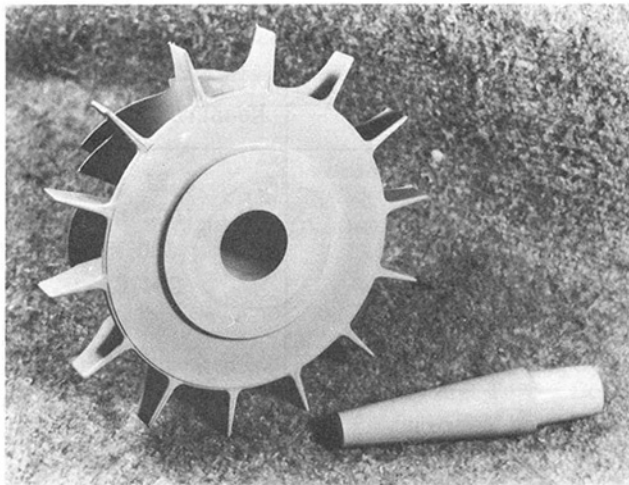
Two pieces of the Si_3N_4 radial turbine wheel separately injection molded
